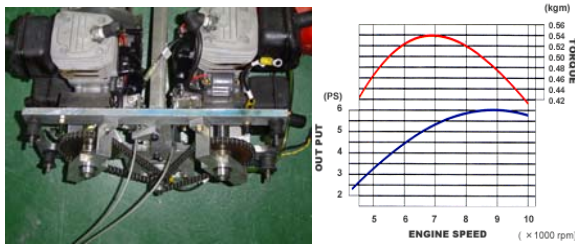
Mount, gear box and Torque Curve of G800BPU Engine
